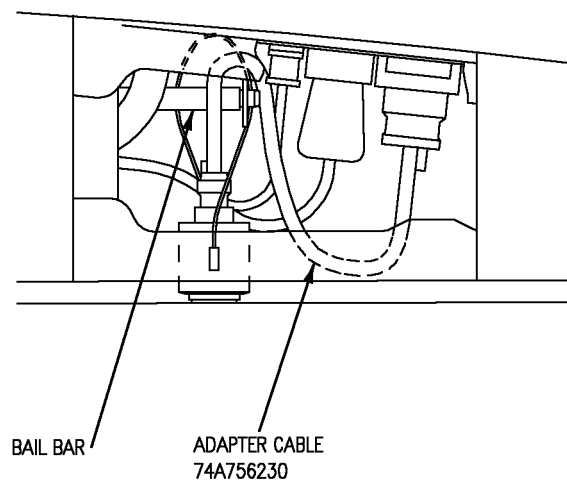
BRU-33 Adapter Cable Installtion (Centerline Station)
